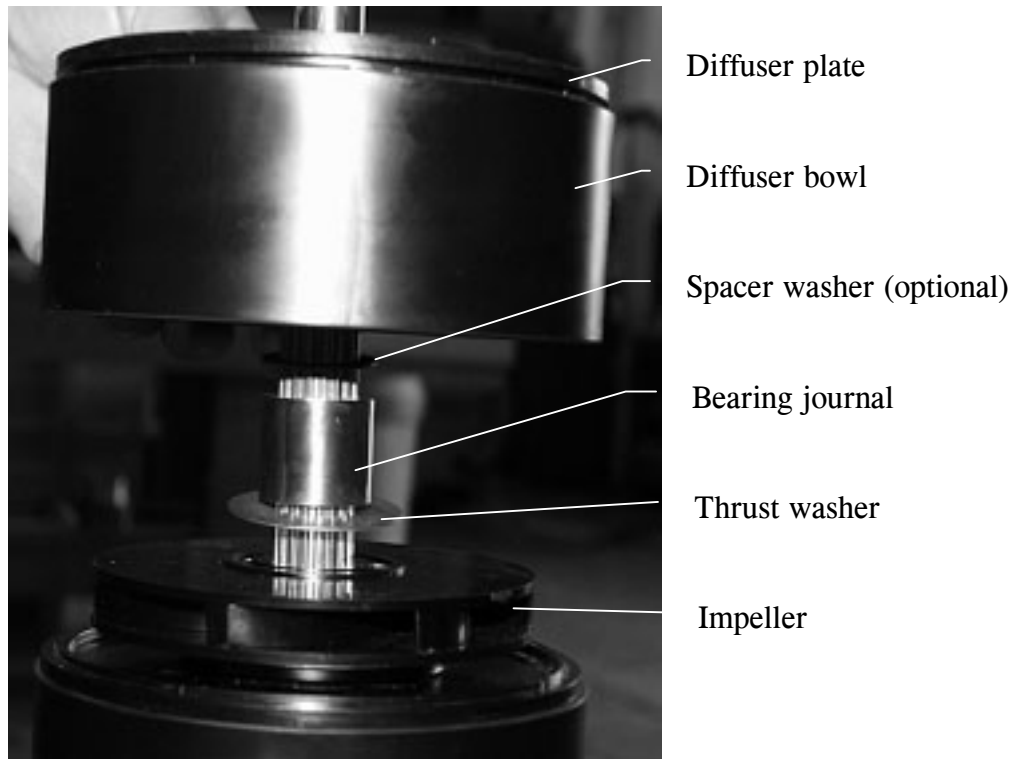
Set the Gap Using Measurements at the Edge of the Parts for 2400-Series Pumps
